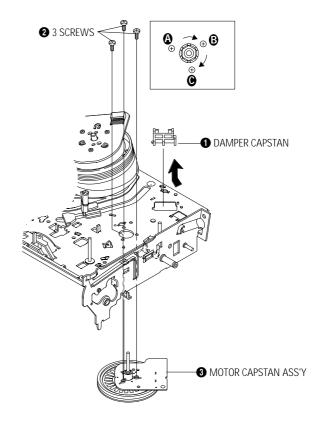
Damper Capstan, Motor Capstan Ass'y Removal
